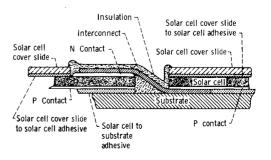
Cross-sectional view of insulated solar cell assembly showing dielectrics.
